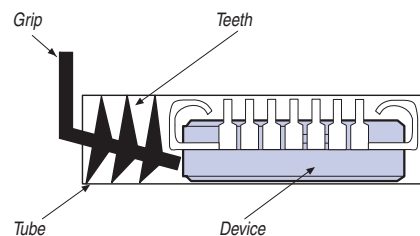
(#) shows how you can properly insert a stopper in a tube.
